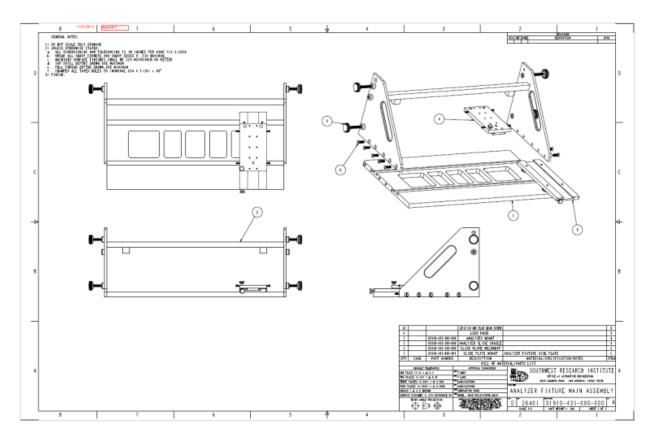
Surface Finish Analyzer Mounting Fixture
